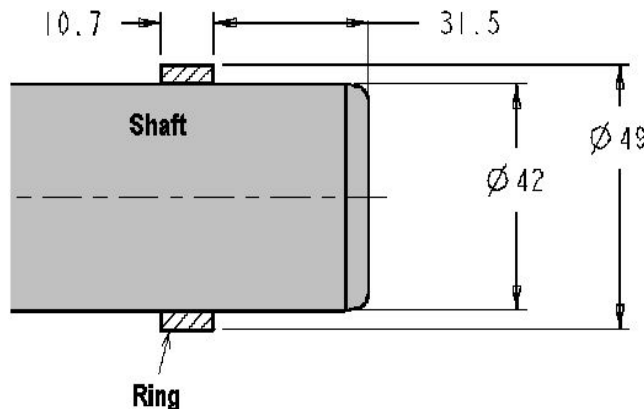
The Ring-Shaft Assembly (all units are in mm)
